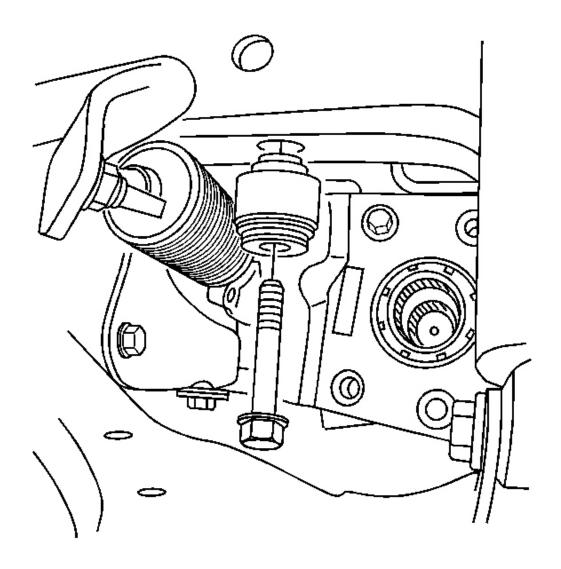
View Of Mounting Bracket To Frame Bolts Courtesy of GENERAL MOTORS CORP.
